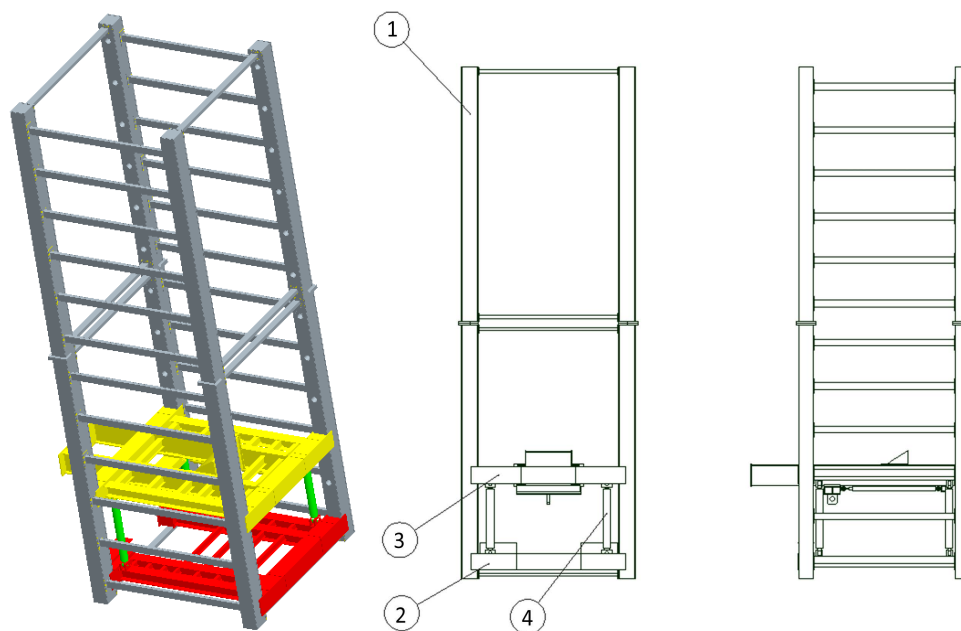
Outline drawing of the lifting device; ① Gantry components; ② Lower ring beam assembly; ③ Upper ring beam assembly; ④ Lifting cylinder
